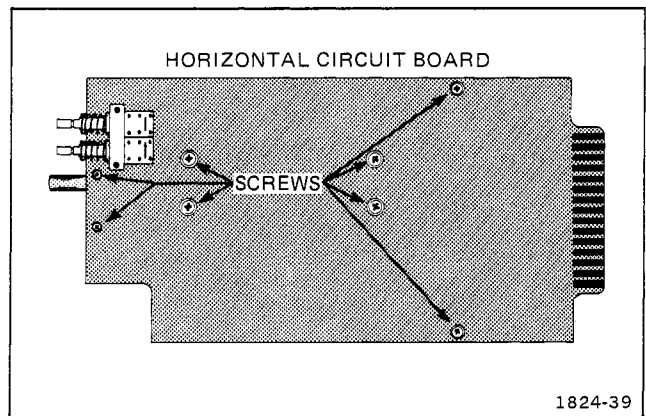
Location of screws holding Horizontal circuit board to module assembly.
